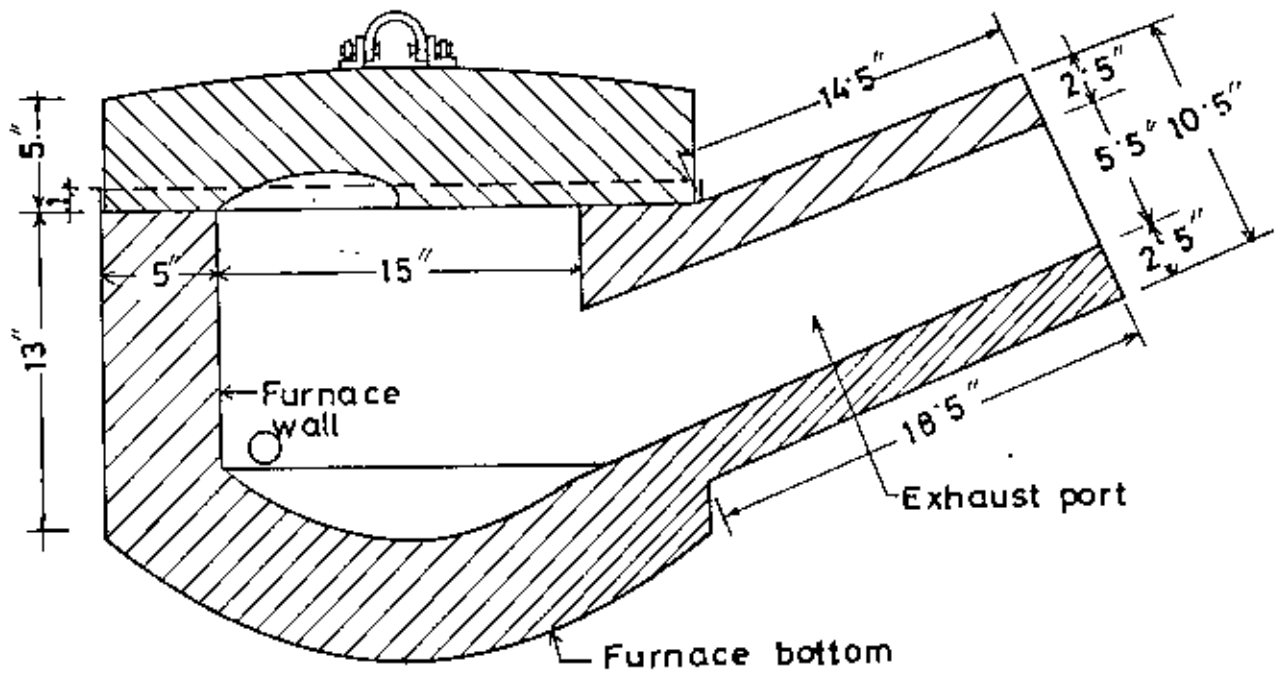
Sectional view at E-E (Fig. 9a) showing the exhaust port.
